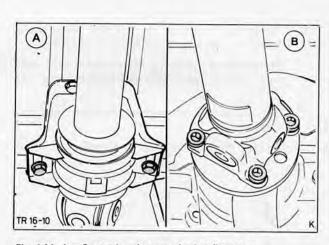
A – Centre bearing attached to floor pan B – Driveshaft attached to drive pinion flange
